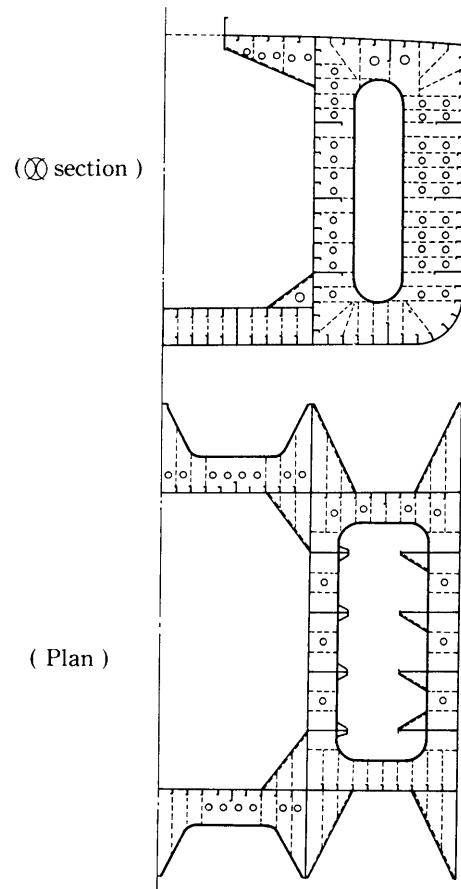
Protective structure [Structure type B, Ref. (29)]
